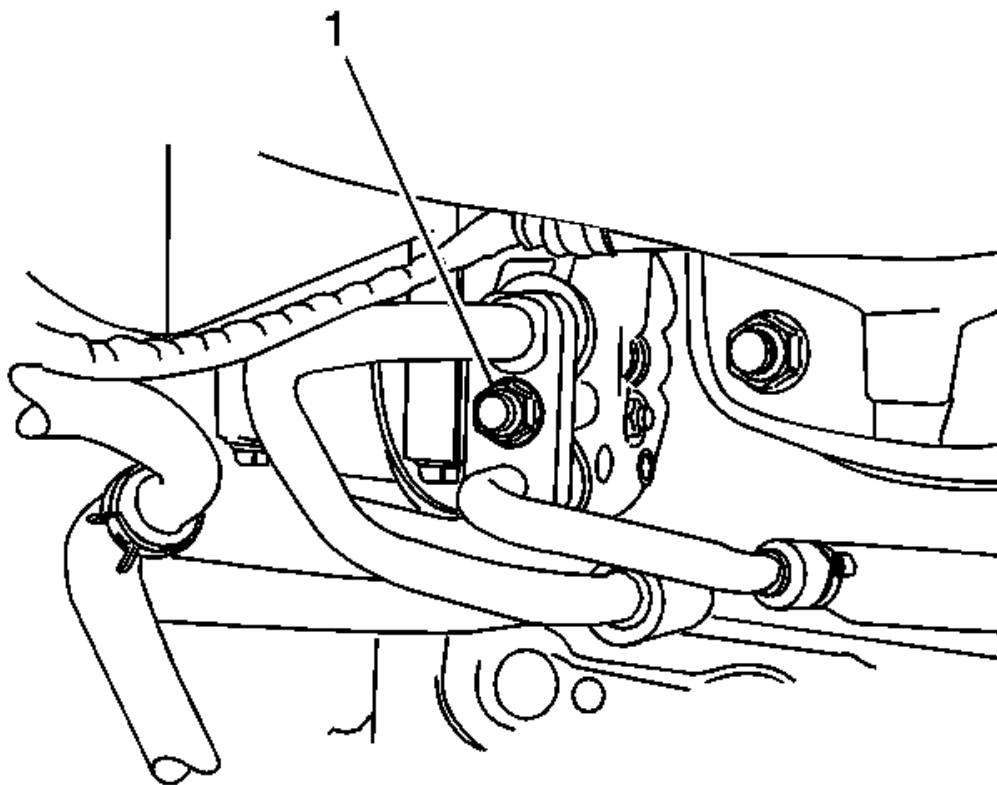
A/C Inlet/Outlet Pipe Tightening Bolt
